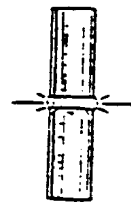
Weld Positions (from Table 3-1) (Sheet 2)
